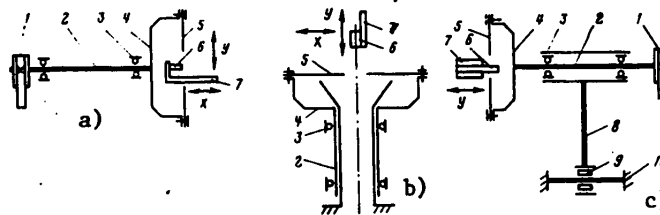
Simplified Mechanical Diagrams of Machine Tools for Cutting by Means of Diamond Wheels with an Inside Cutting Edge
